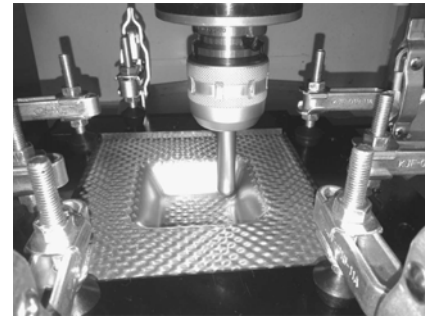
CNC-based incremental forming machine using cylindrical tool and toggle clamp jig
